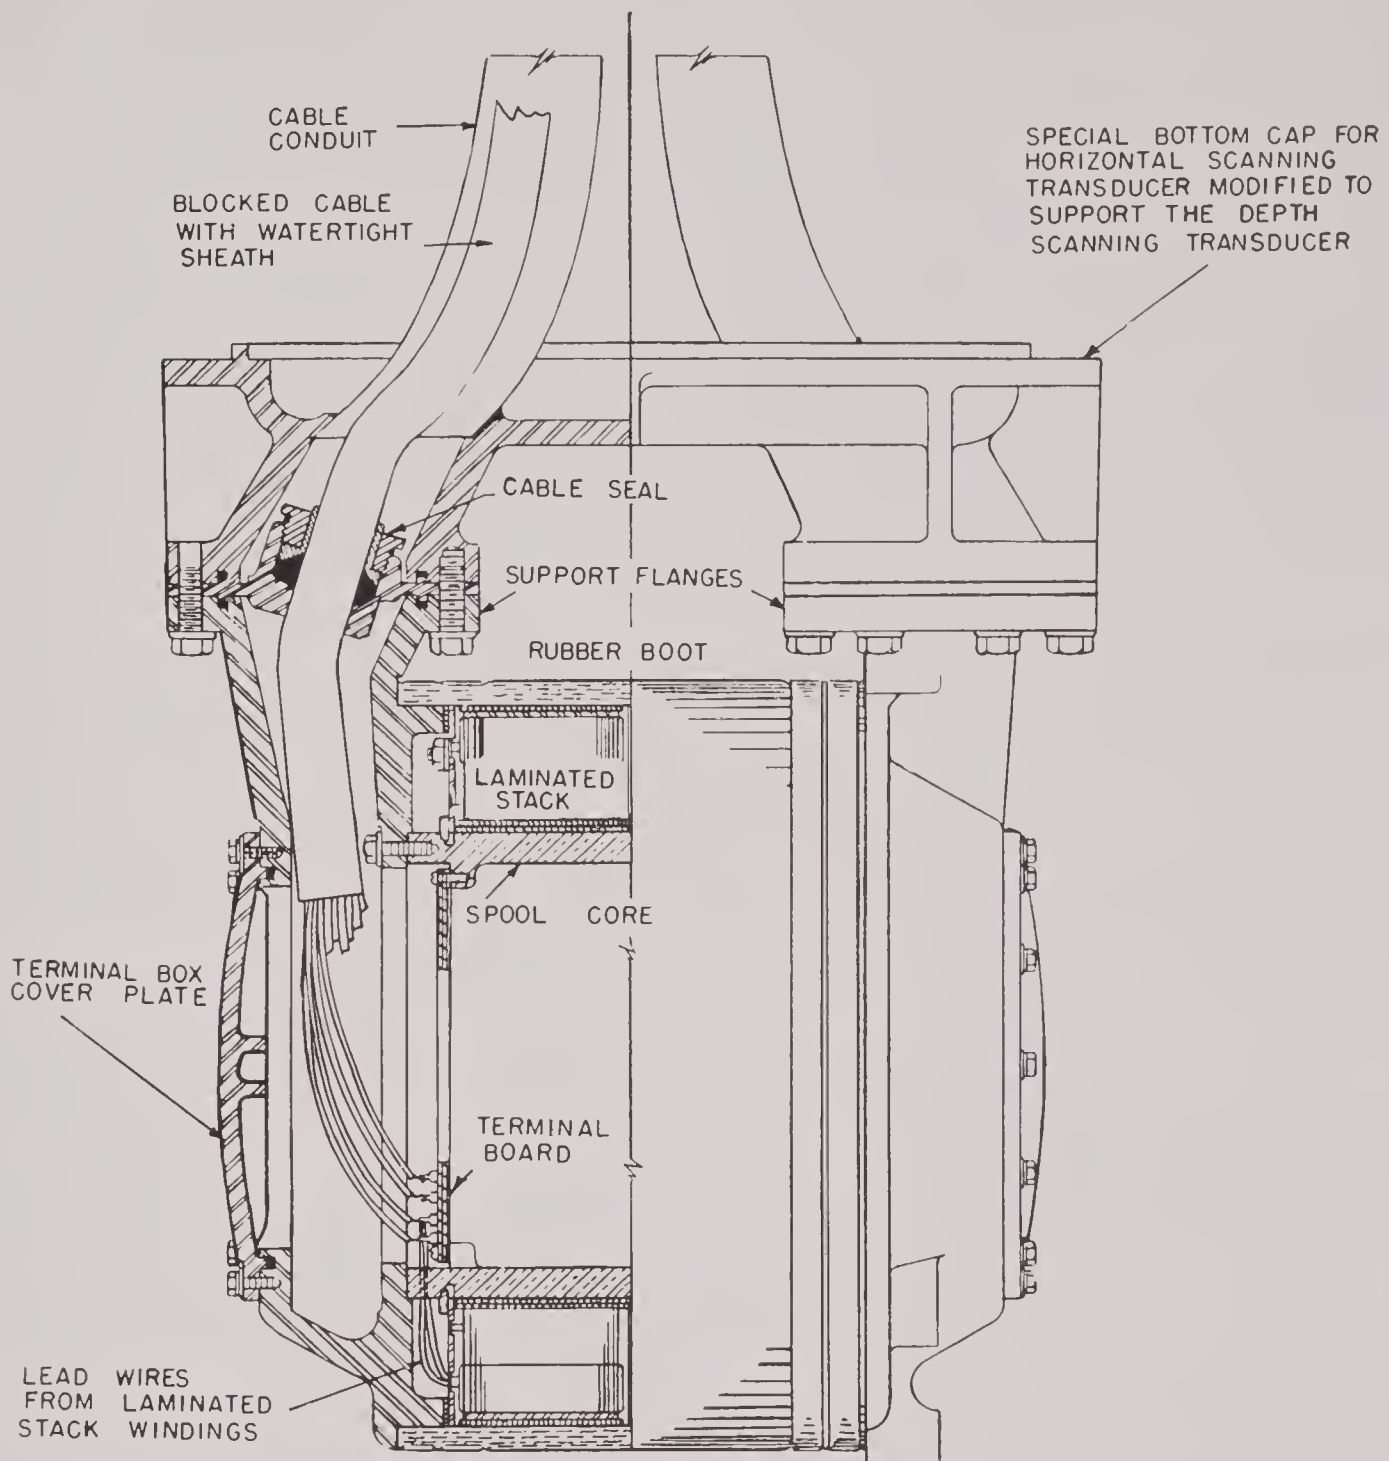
Design details of a depth scanning transducer with a two-flange support and two cable seals.
